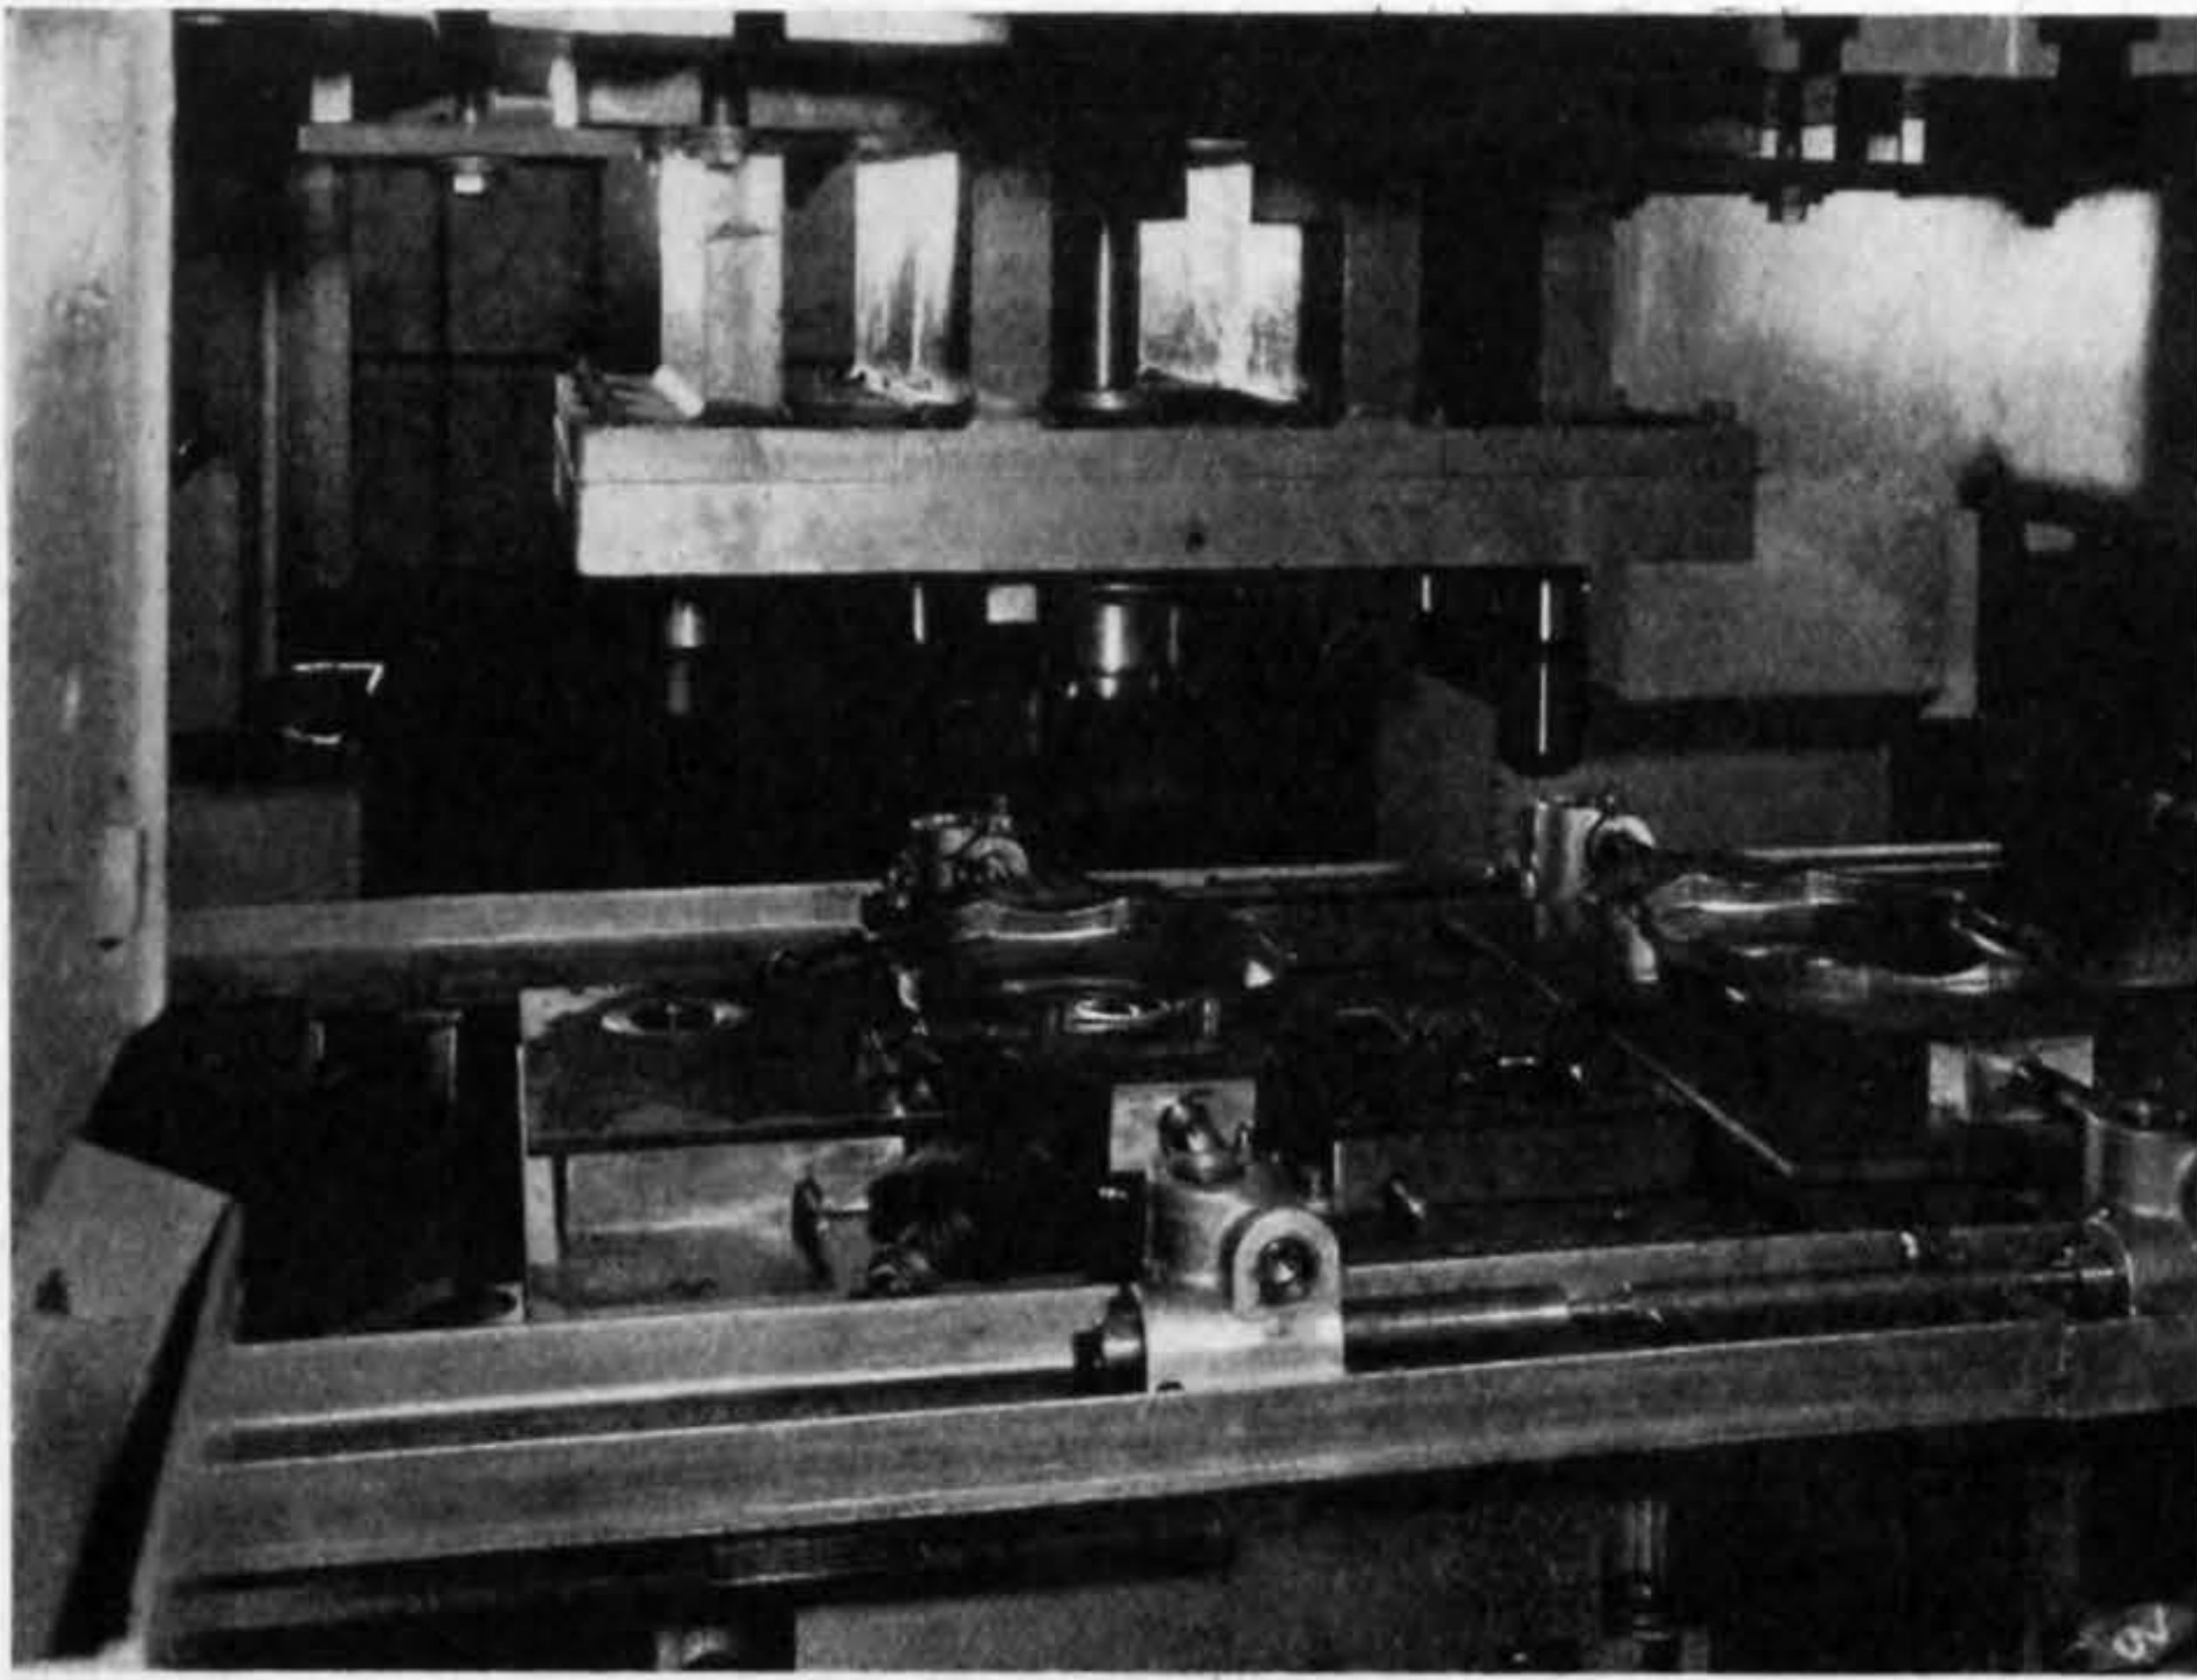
Bore sizing and undercutting of wheel in reverse position in fourth press
